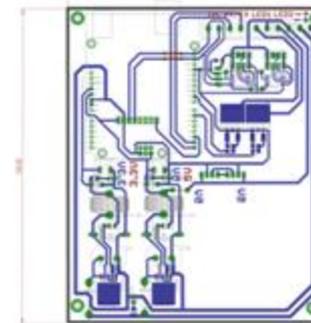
Prototype printed circuit board of EMR-MUD equipment.
